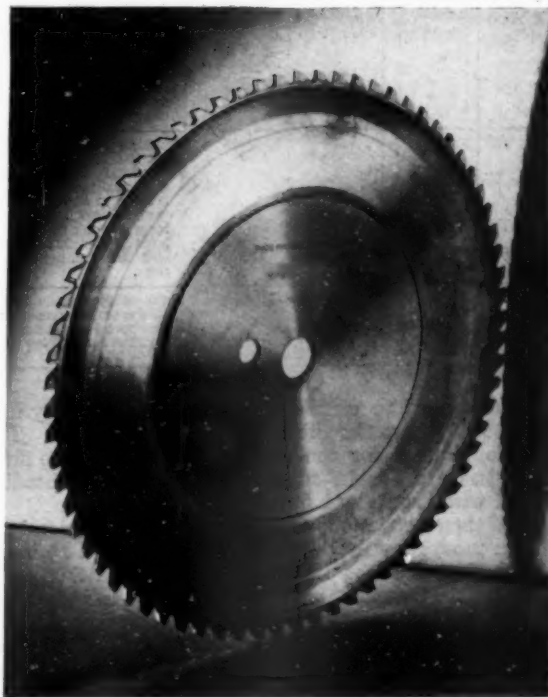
Hard metal tipped 32-in. saw for cutting riser heads from aluminium crank cases, roughly 13 x 44 in.; 1,300 castings were completed before reconditioning.
